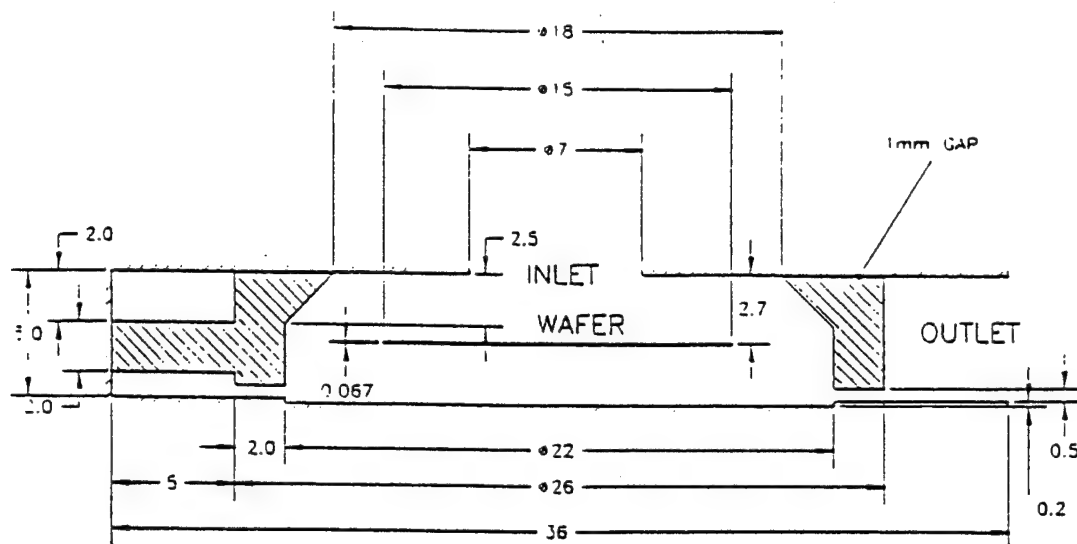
Side View of Model Geometry (all dimensions are in centimeters)
